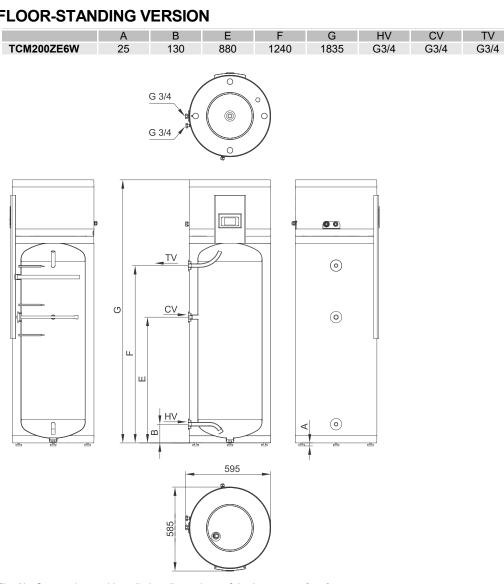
Connection and installation dimensions of the heat pump [mm]
